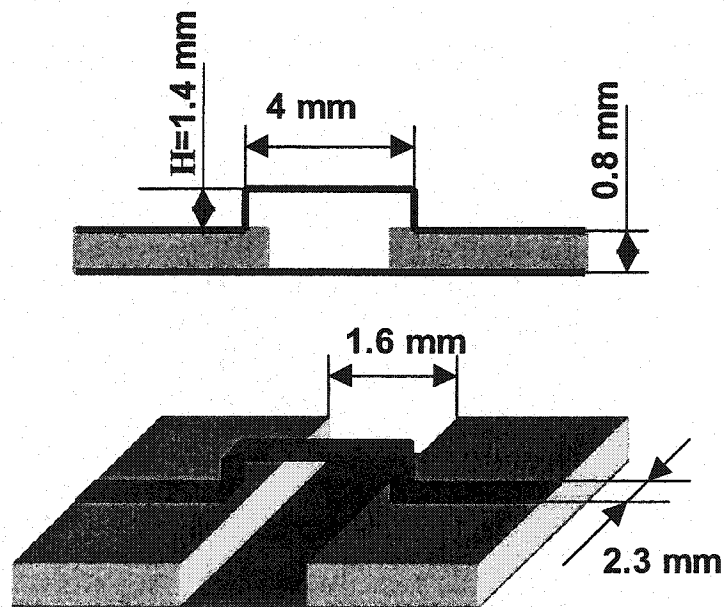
(b) Geometrical view of conventional ribbon interconnects
